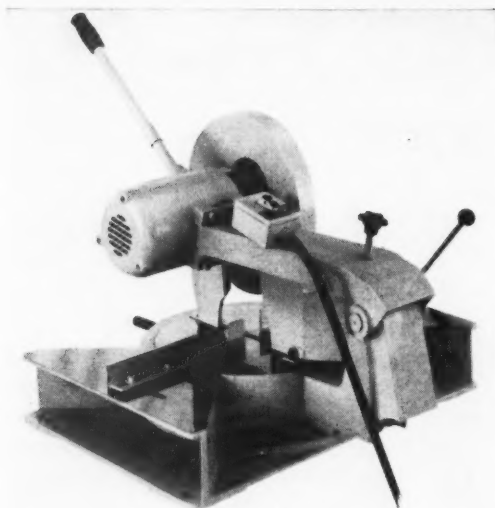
Stone Model M-14 Abrasive Cut-Off Machine on which aluminum motor housing of the design shown in Fig. 1 is used
